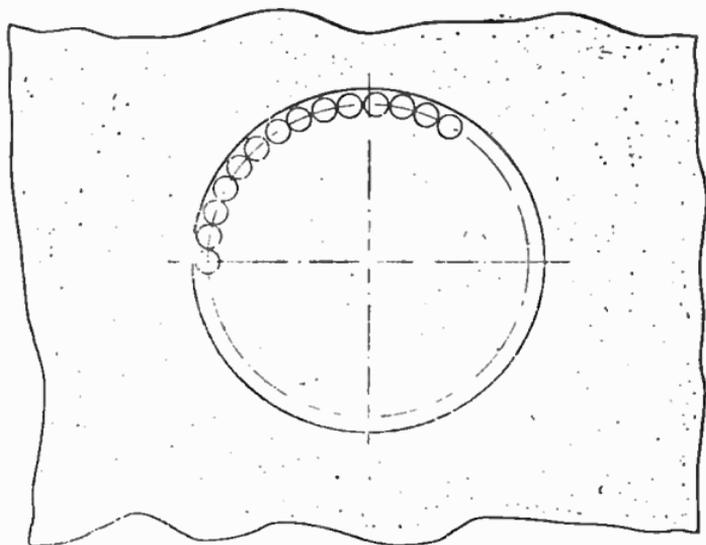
Method of drilling large diameter holes. After drilling is being completed the remaining corners are removed by a round file of suitable size.
